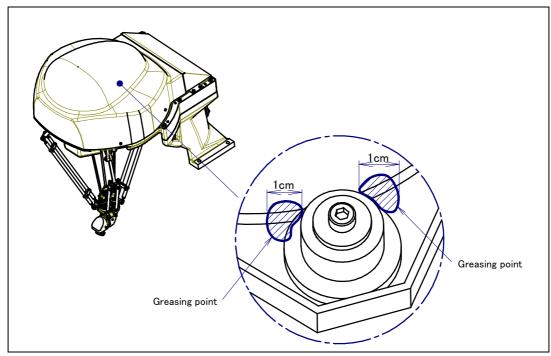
(a) Supply grease to J4 to J6 gears
